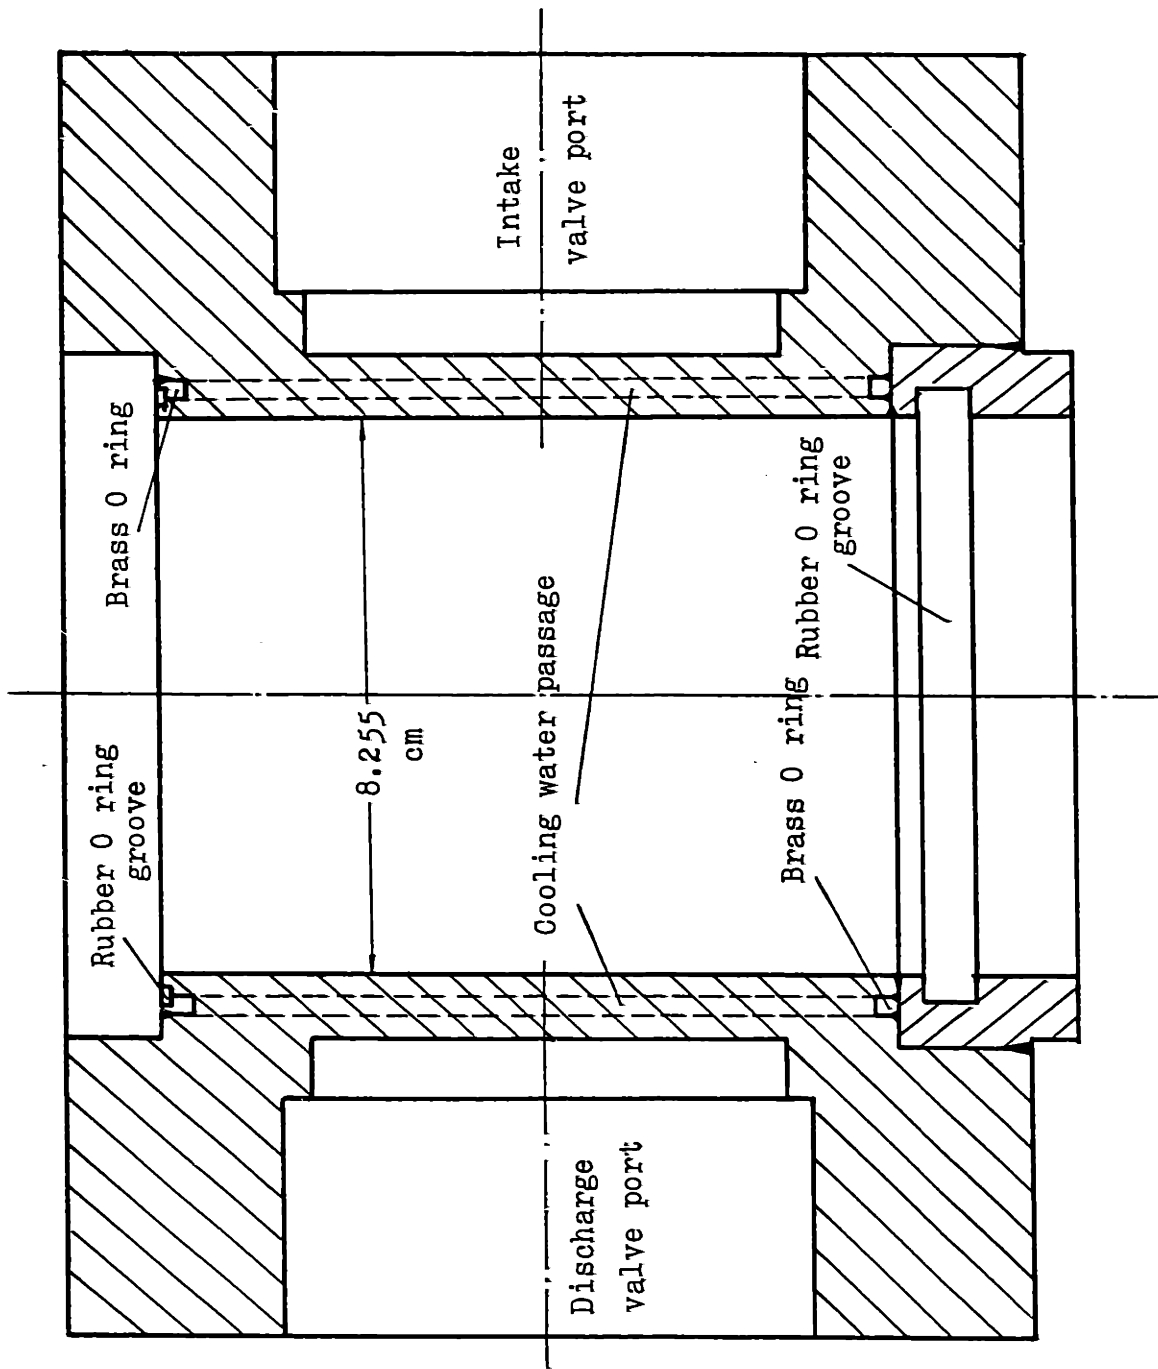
(b) New, effectively cooled compressor block (cross-sectional sideview)
